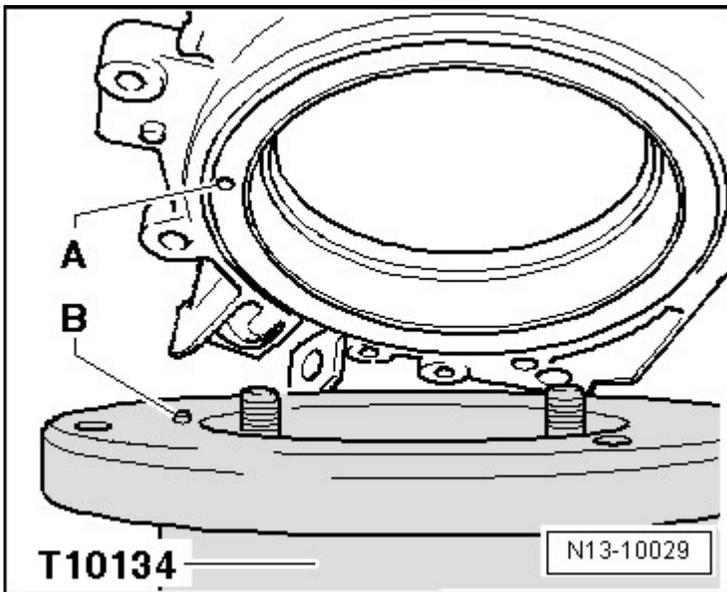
Identifying Front Side Of Sealing Flange Placed Onto Assembly Tool T10134 To Position Locating Pin In Bore Of Sensor Wheel
